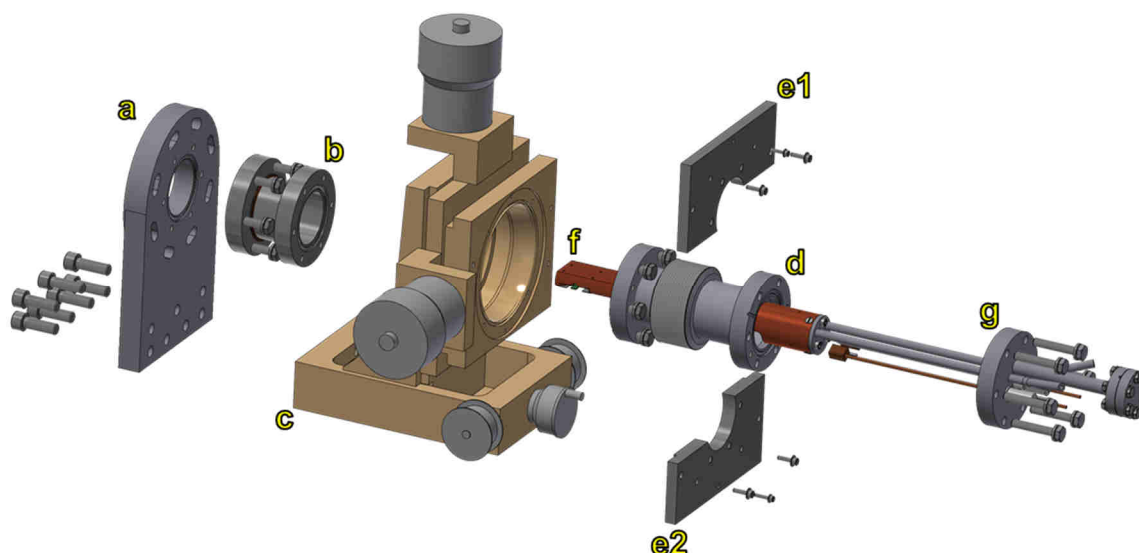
Expanded 3D presentation of the portable manipulator assembly. a: ground flange; b: home made CF-40 extension tube; c: three dimensional linear motion; d: Bellows with 50 mm axial stroke from Vakuum-Anlagenbau GmbH; e1, e2: two piece plate to mount the base flange g and bellows d; f: Cu reservoir; g: CF-40 base flange of the installment. Tightening pieces are of the DIN norm and are therefore not specified.
